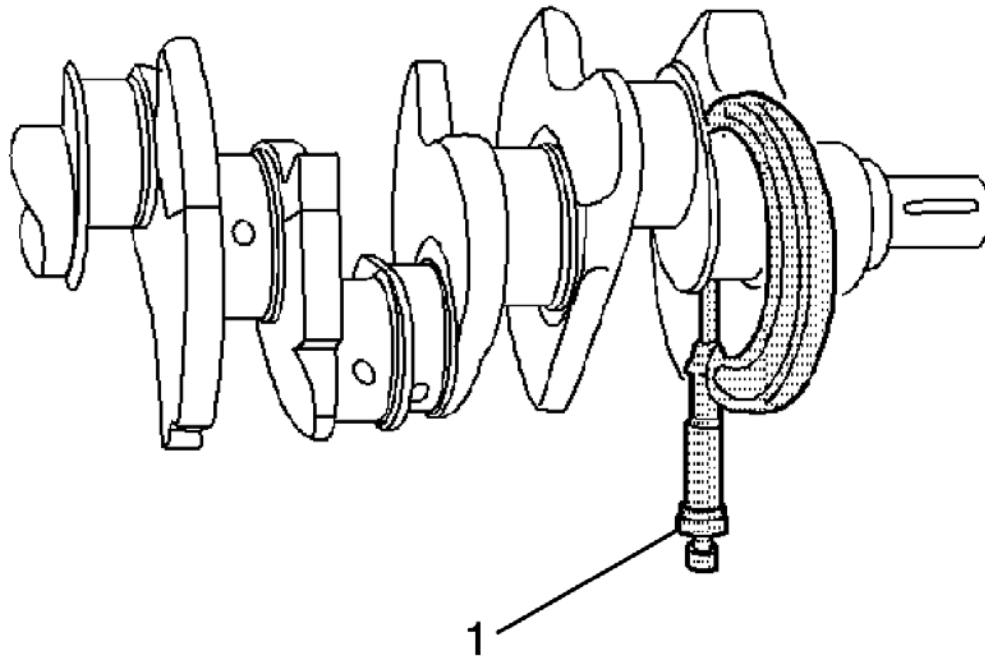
Measuring Crankshaft Bearing Journal Using Method A
